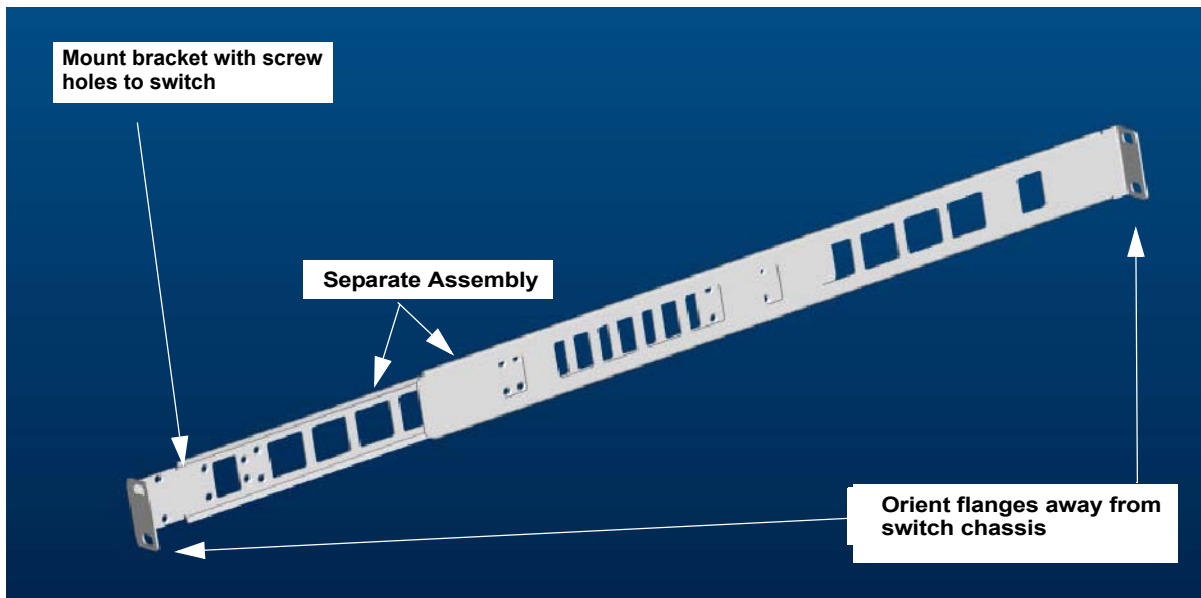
Separate Assembled Brackets before Mounting onto Switch
